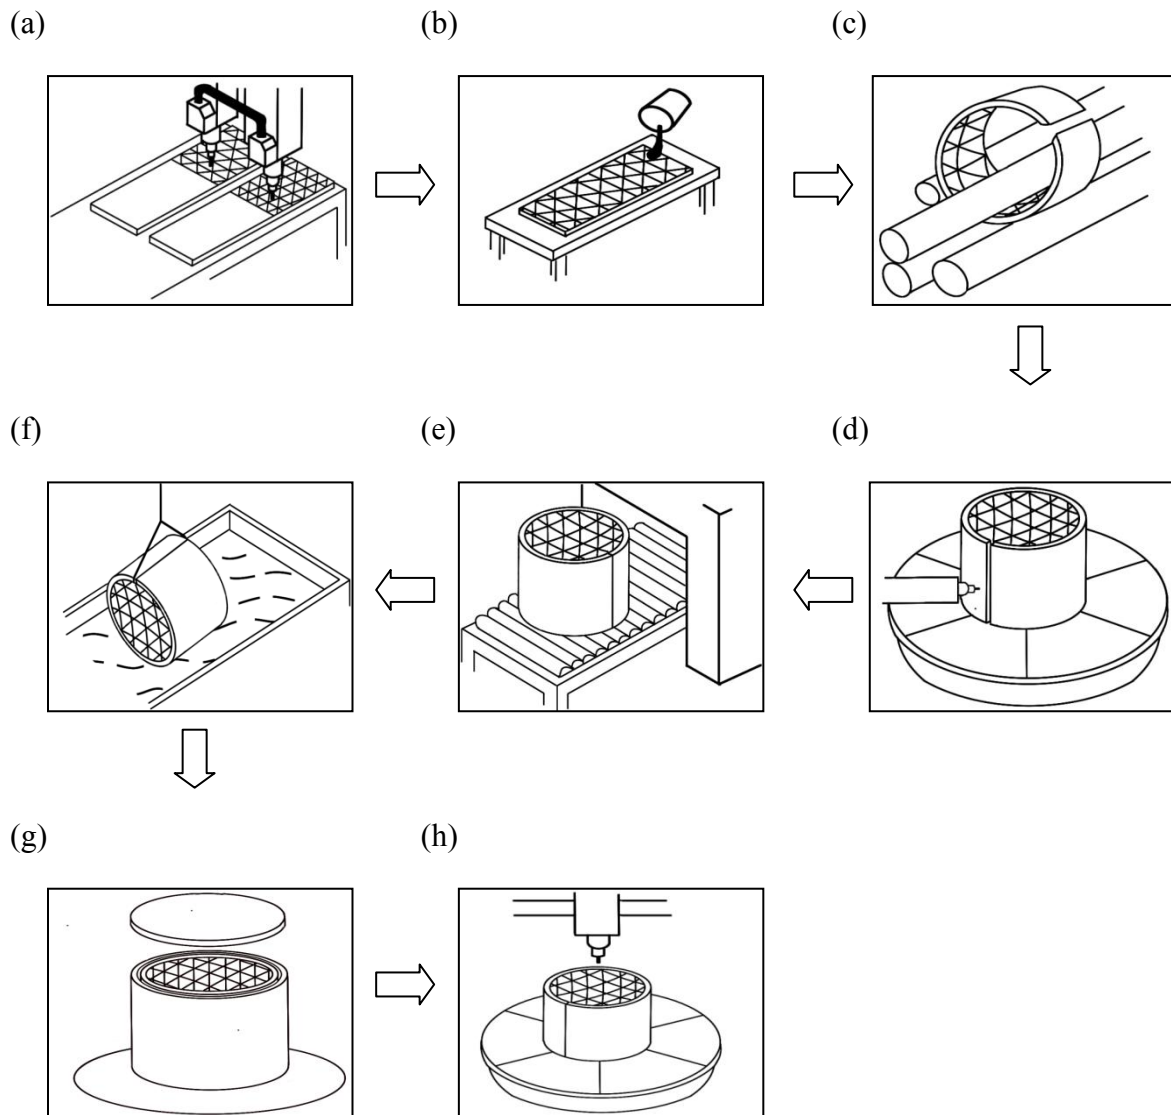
A schematic illustration of the CAF process for forming one piece isogrid cylindrical assembly by hydro forming.
